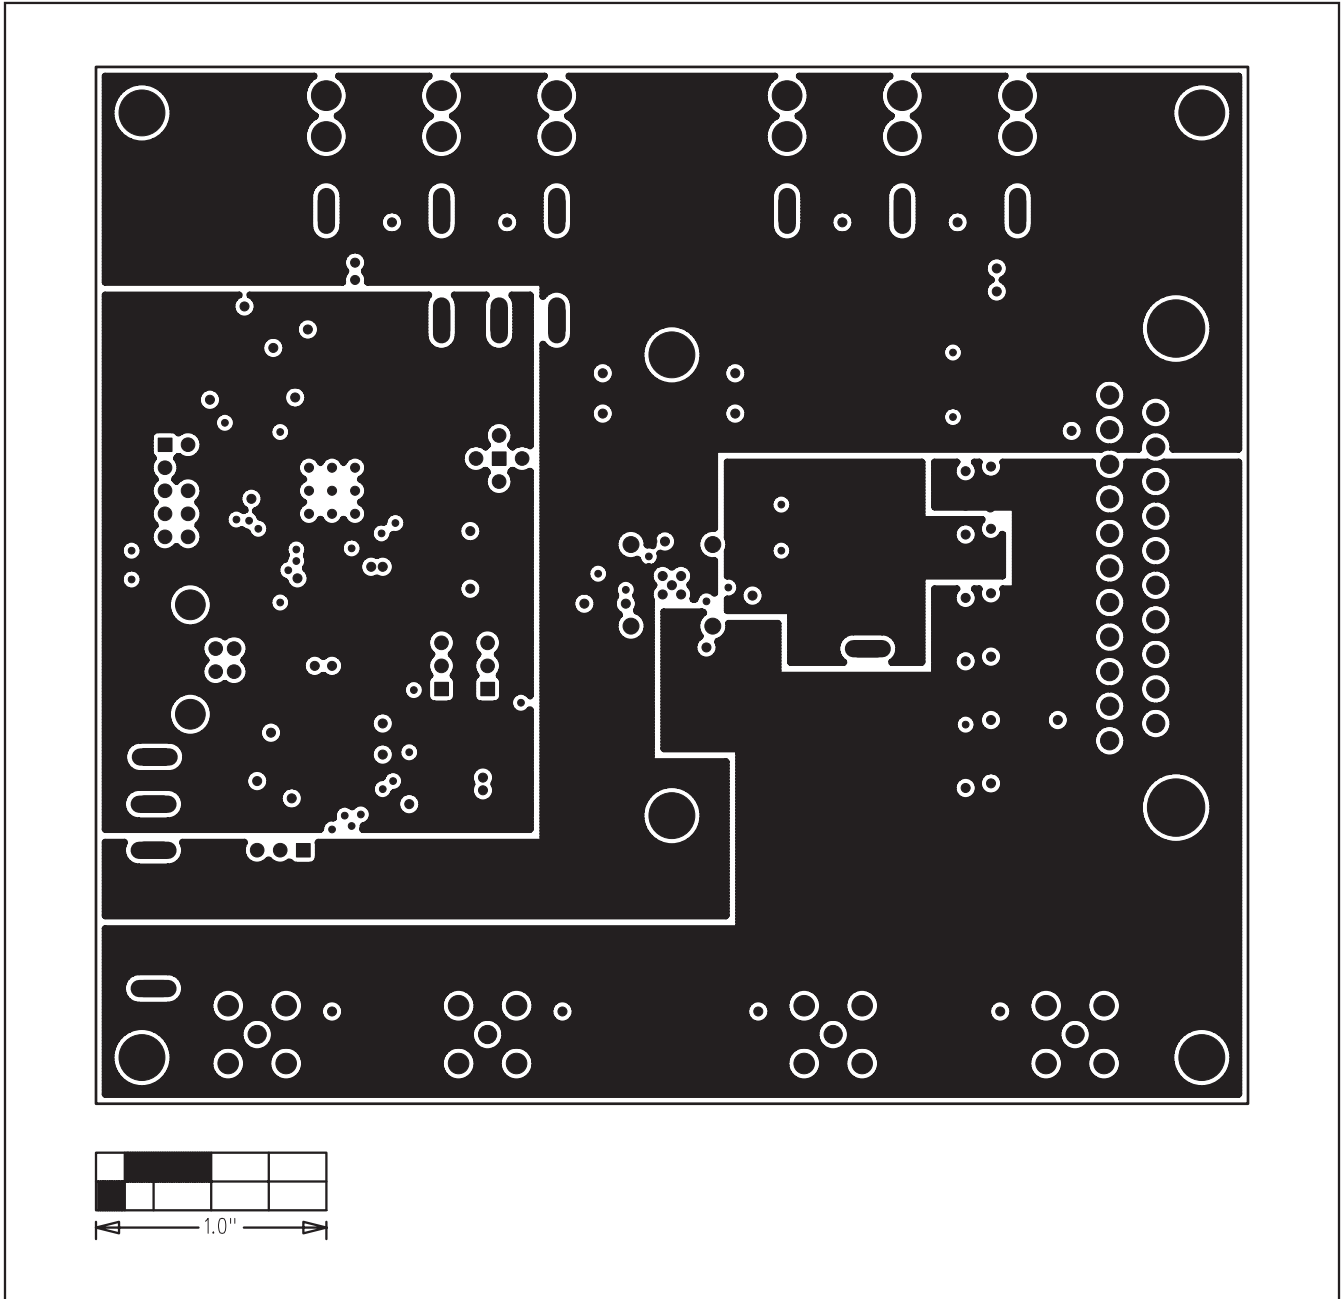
MAX9597 EV Kit PCB Layout—Inner Layer 3
